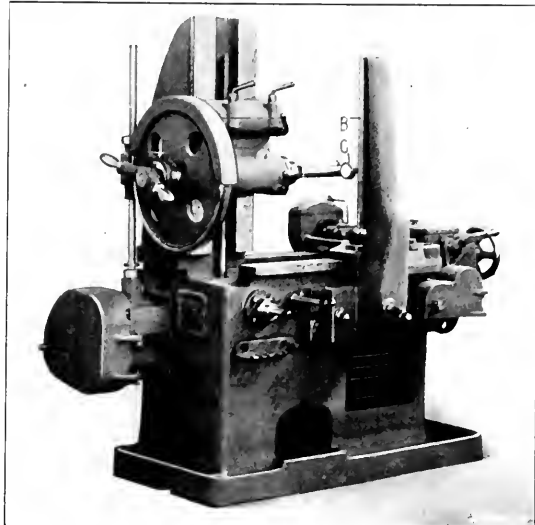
Testing Parallelism of Faces of Outer Support and Housing
